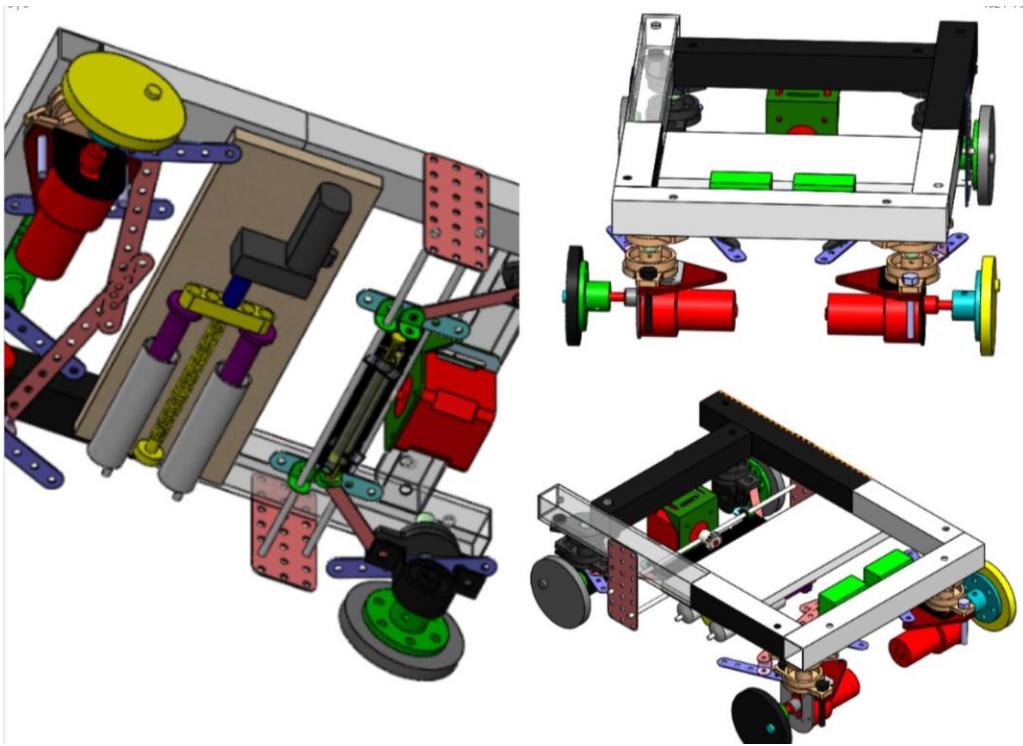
Complete CAD. Clockwise: From Top: Bottom View, Side View, Top Three-Quarter View
